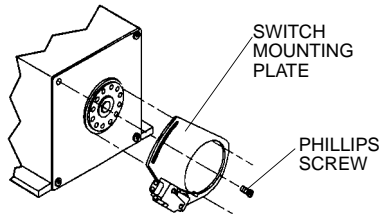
SWITCH MOUNTING PLATE LOCATION
